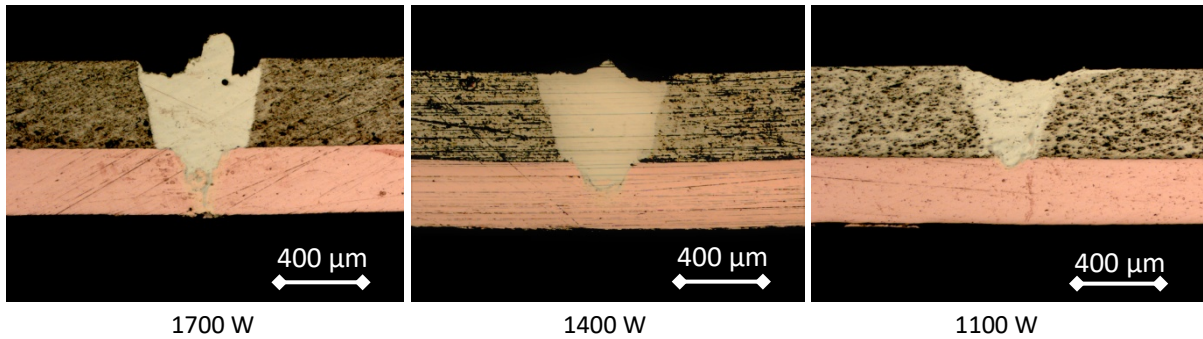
Examples of weld beads (IPG YLR 300-3000 QCW)
